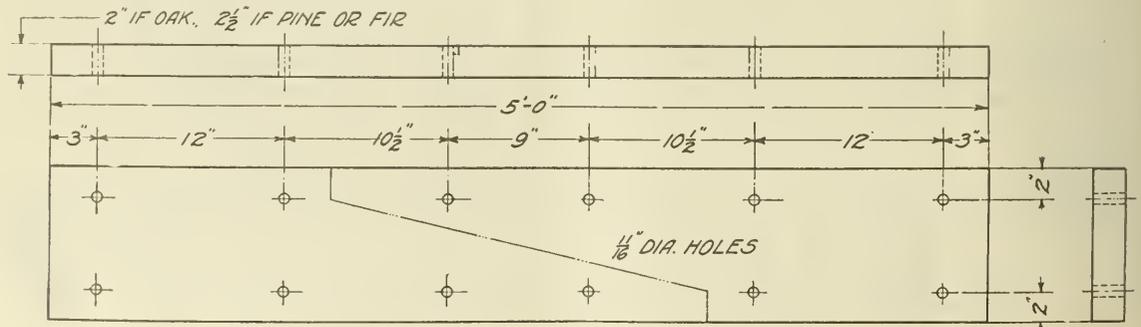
Center and Intermediate Sill Three-Bolt Splice Reinforcement
